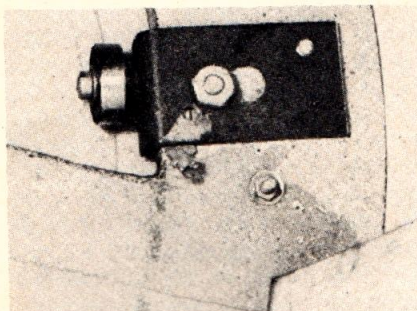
BALL-BEARING WHEELS mounted on bottom bulkhead support body as it rotates.
